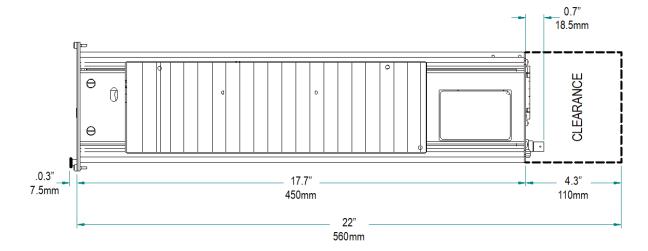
DCX S Power Supply Dimensional Drawing (Large)
